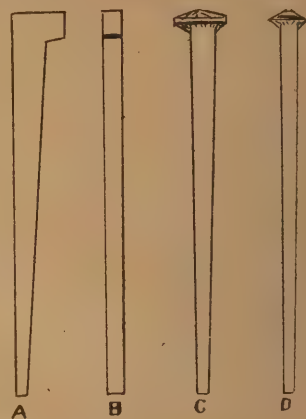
NAILS, FLOOR BRADS, CUT CLASP.
